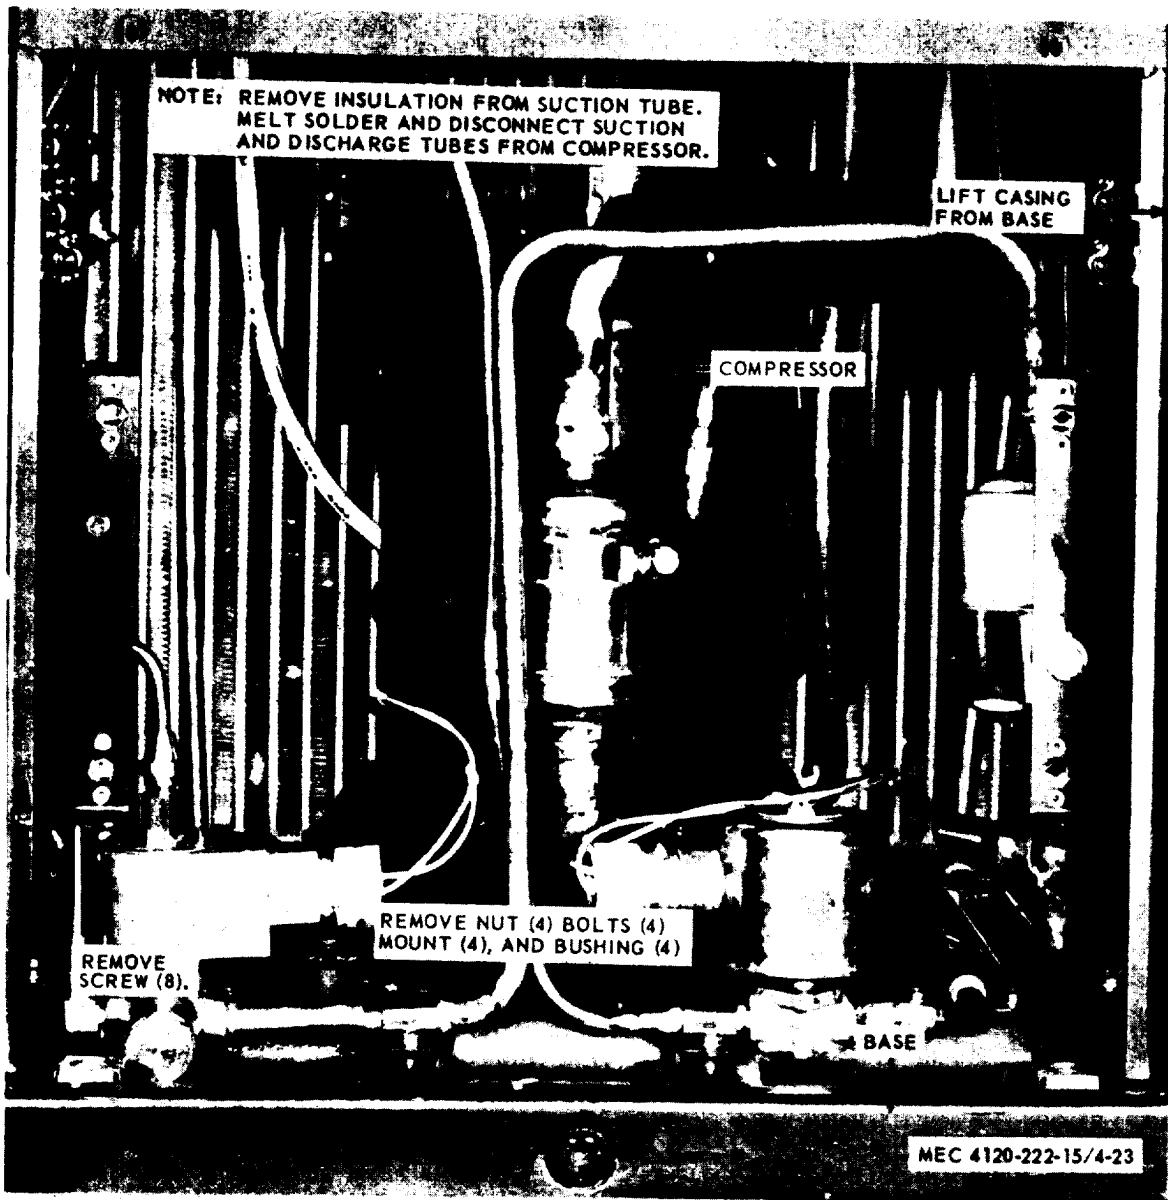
Ⓞ. Compressor/motor assembly, removal and installation.
